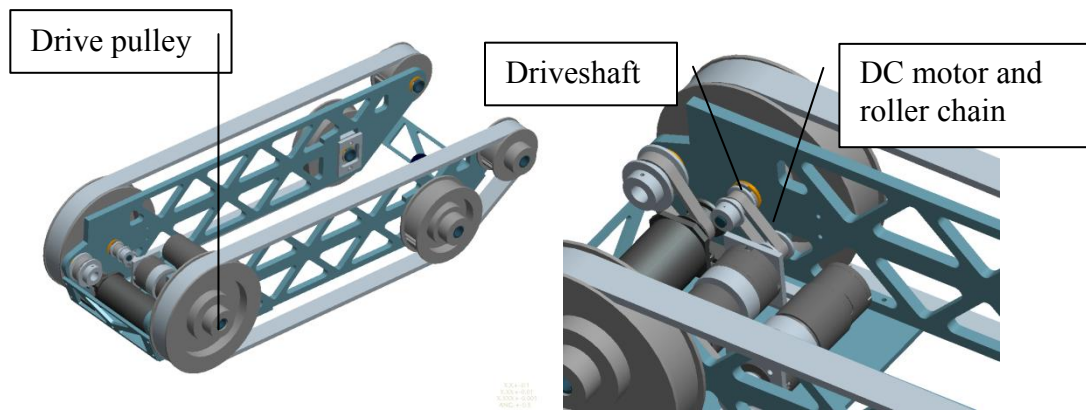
Drivetrain, right highlights dc motors and roller chain connection to drive shaft and drive pulley
